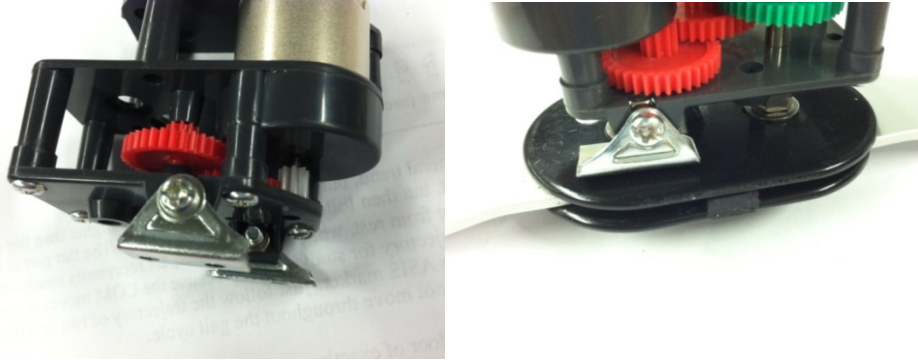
Pictorial Process of Shaft to Hinge Assembly
